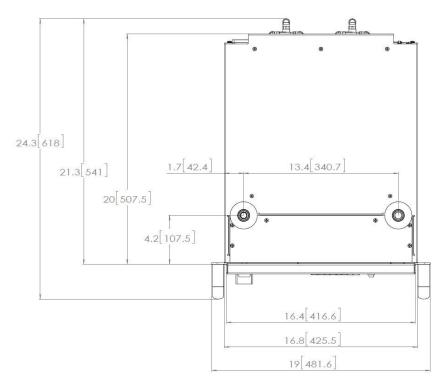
Model 5028*i* Top View—inches [millimeters]
